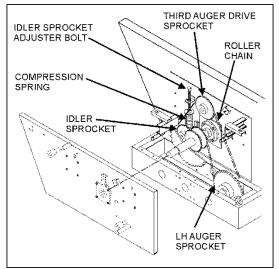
LH & THIRD AUGER CHAIN DRIVE
